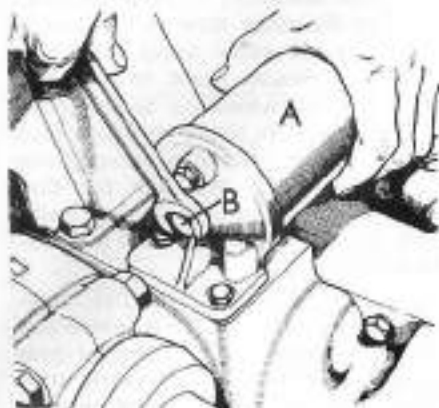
Removing by-pass filter housing (A) by unscrewing bolt (B). On later models with by-pass filter, filter base is mounted on an oil return block for external cylinders rather than being bolted directly to axle housing as shown.
